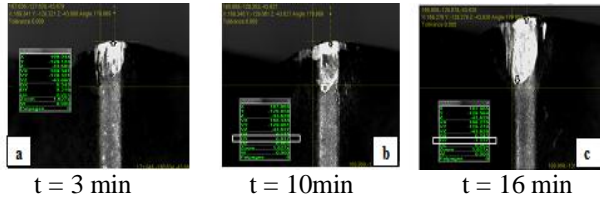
Details of VB wear on the tool face after machining ( $v_c = 1100$  m/min,  $f = 0.08$  mm/rev and  $a_p = 0.5$  mm)
